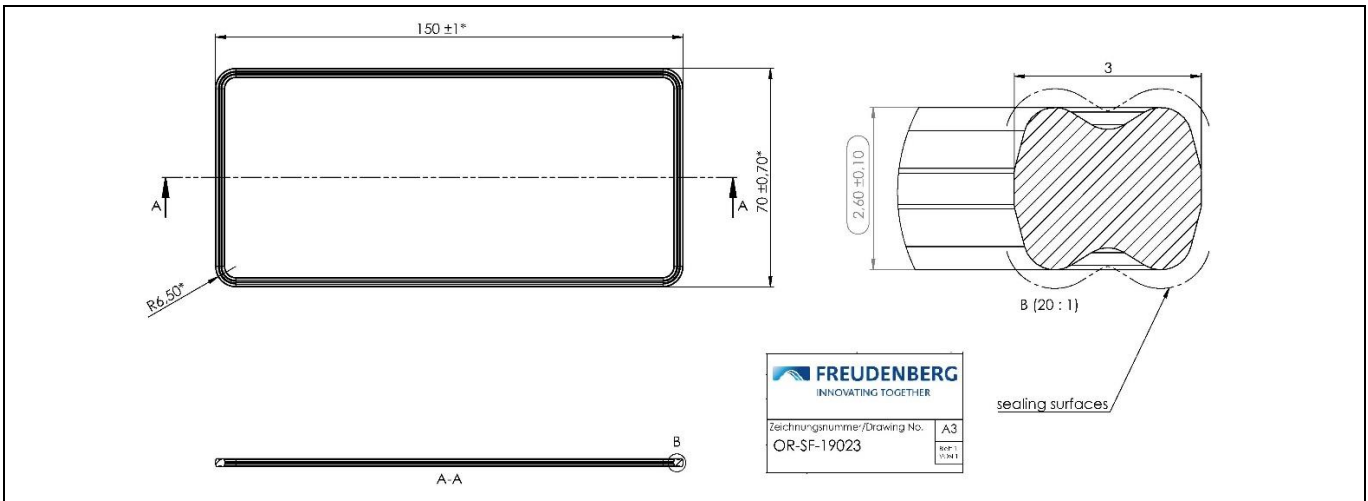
Drawing of sealing ring from Freudenberg Sealing Technologies OR-SF-19023.
